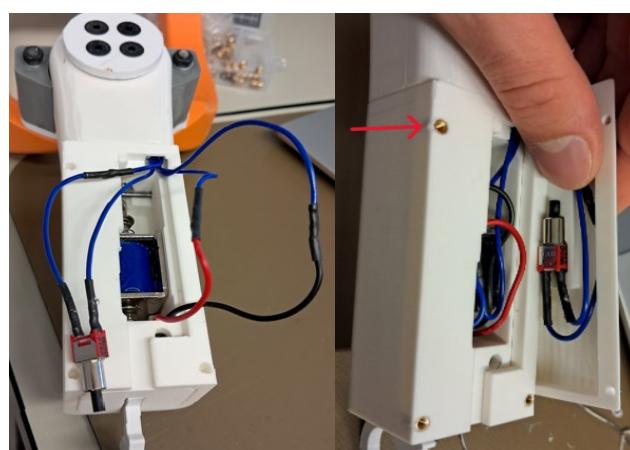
Soldering Cables and Closing Mechanism [Own Illustration]
